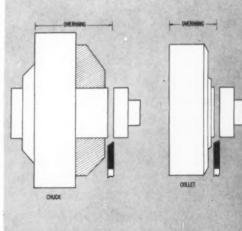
Carbide blade cut-off tools have been found to produce much better results in turret lathe operations if a collet holding mechanism is used instead of a chuck.
